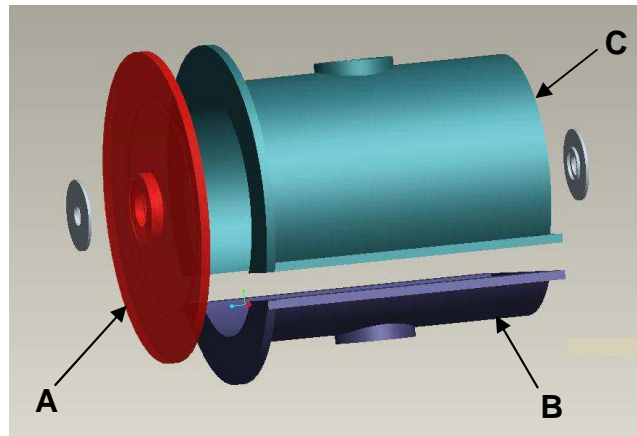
Exploded view of mill chamber assembly. A – end flange, B – discharge tray and C – mill chamber (top half).
